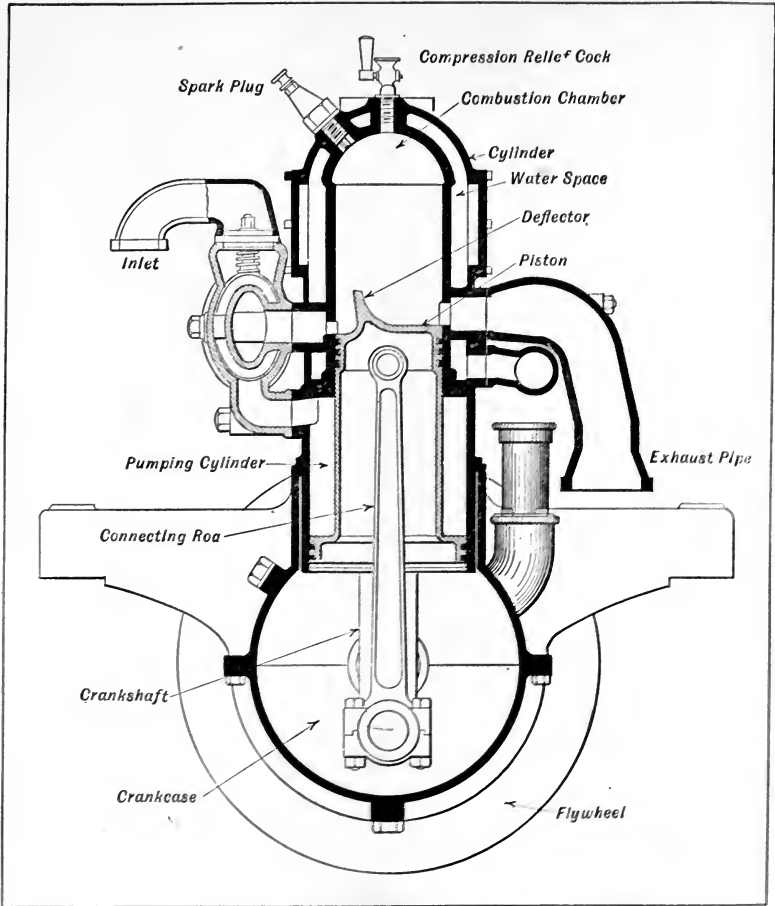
The Cote (French) Two-Cycle Motor is a Good Example of the Type Employing a Two-Diameter Piston and Distributor Valve.
